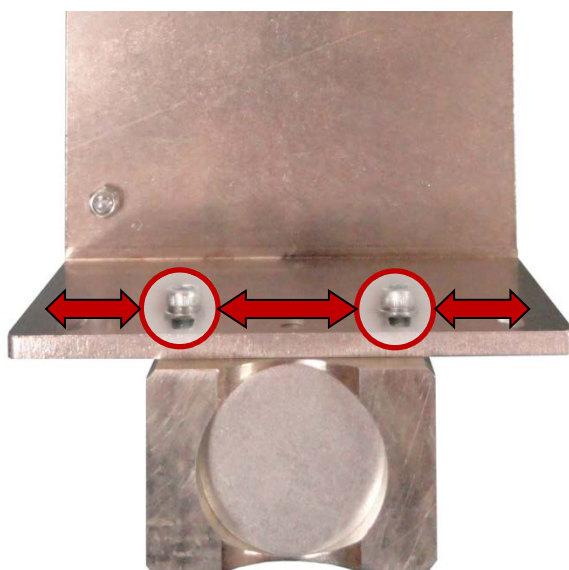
Side to side magnet adjustment on the bottom side of the RSA-34
